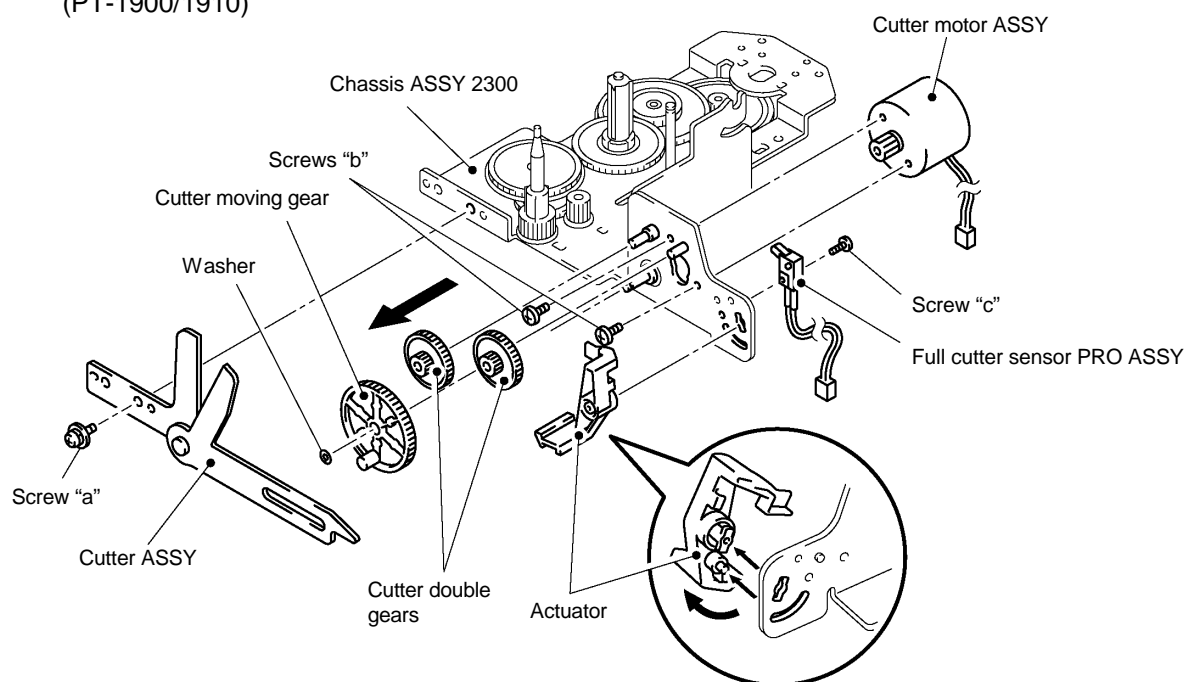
Removing the Cutter ASSY (PT-1900/1910)
